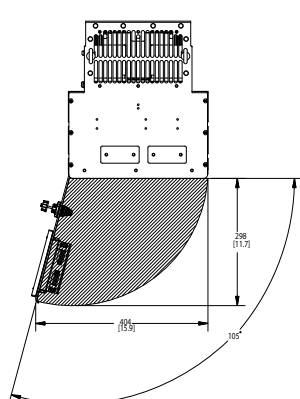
Front Clearance of IP21/IP54 Enclosure Type, Frame Size D1h.
